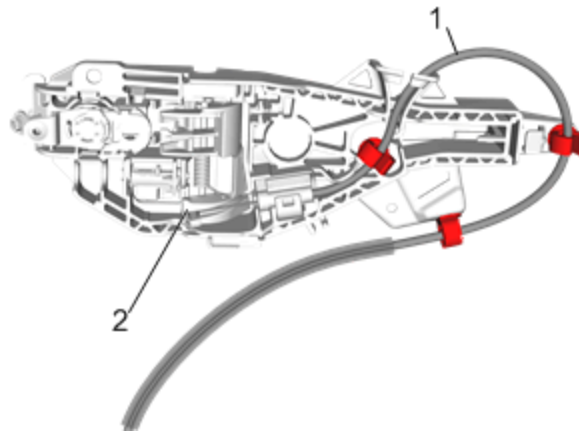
Side Door Outside Handle Bracket Cable And Counter Balance
